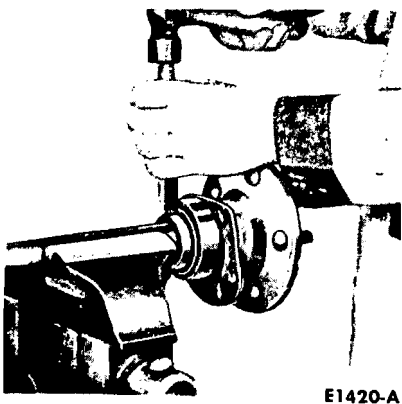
Removing Rear Wheel Bearing Retainer Ring
